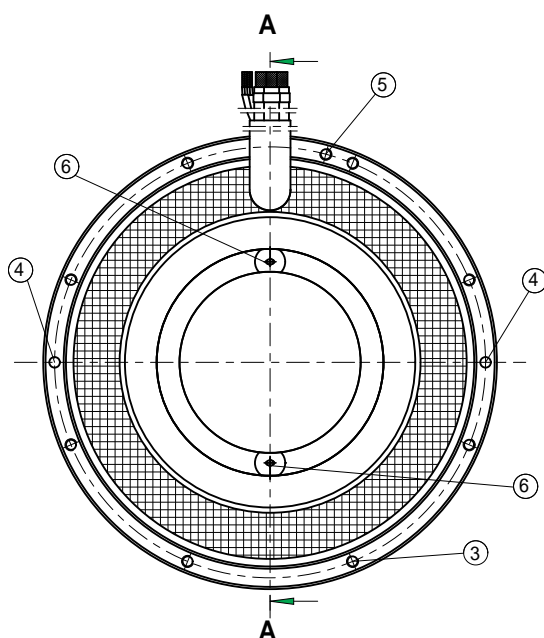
1MB 270 frameless spindle motor - dimensional data (part 1)
